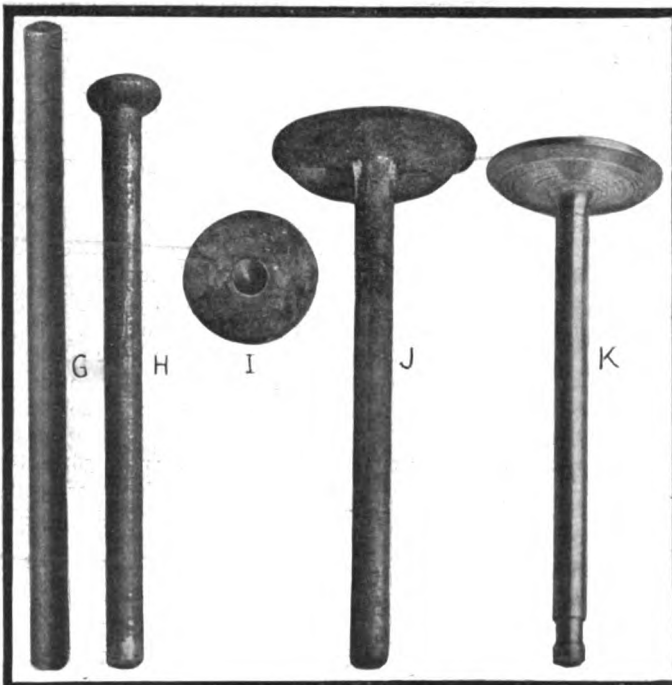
Components of the built-up valve, showing the various stages of development of valve stems and mushroom welded to it
